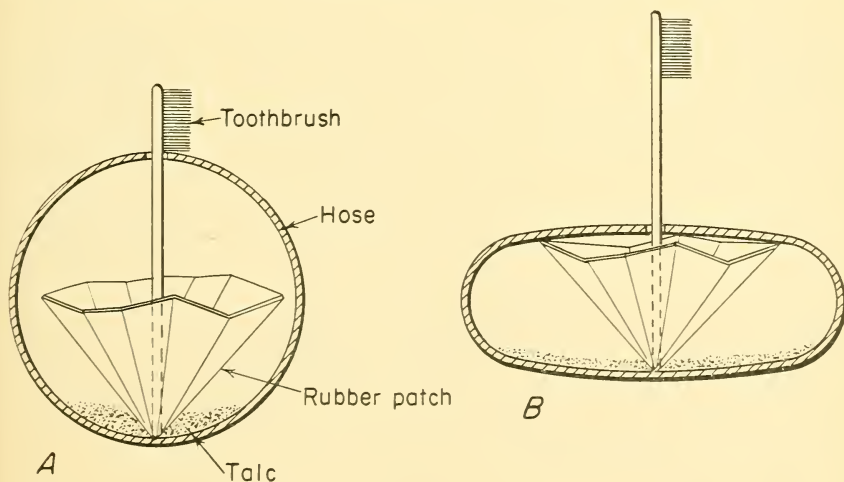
A, Toothbrush handle in proper position to apply patch; B, hose alternately pressed and released only to upturned points of patch until patch is flattened.
